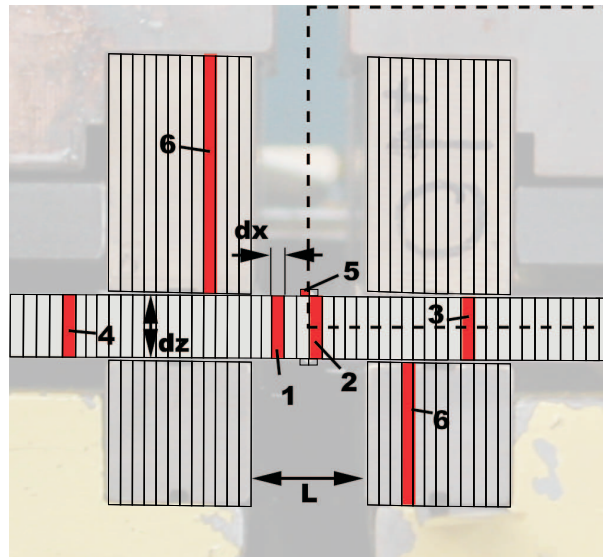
schematic representation of the working area, divided into sections. 1 through 5 are parts of the welding material: deformable sections 1, upset sections 2, welding seam sections 3, undeformable sections in between 4 and behind 5 the electrodes. 6 represent the clamping sections.
